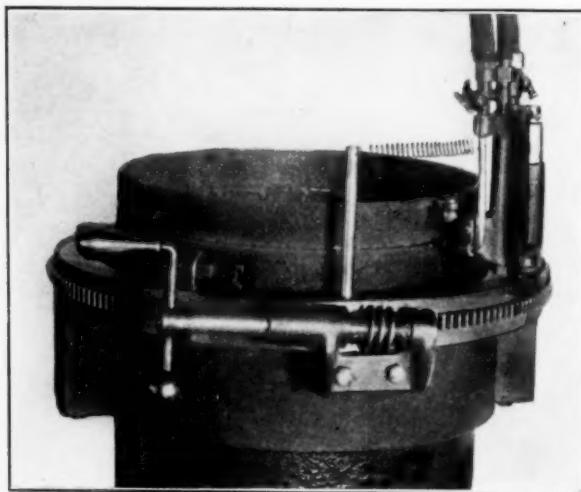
TORCH-GUIDING DEVICE FOR CIRCUMFERENTIAL CUTTING
